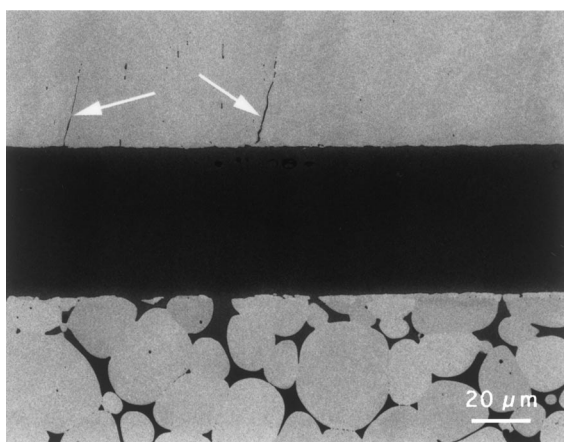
Cross-section of 95% tungsten (bottom) brazed to pure tungsten at 1275°C using Pd-35Co. Grain boundary cracking of tungsten indicated by arrows.
